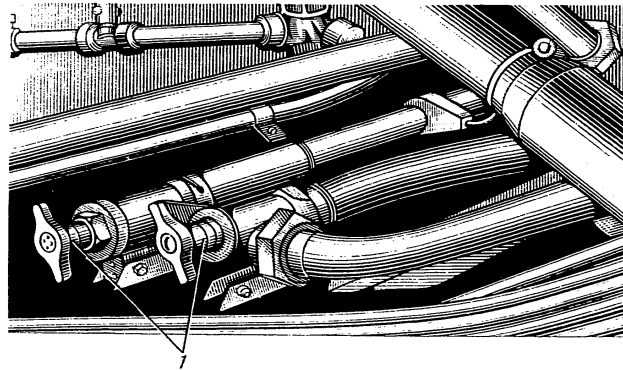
OIL DRAIN COCK ARRANGEMENT
